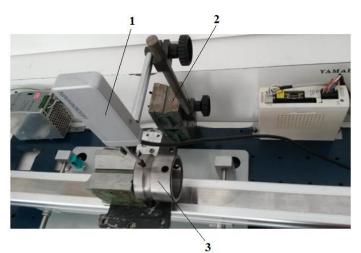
Measuring system support disposing: 1 – magnetic flexible support; 2 – measuring device; 3 – tested probe
